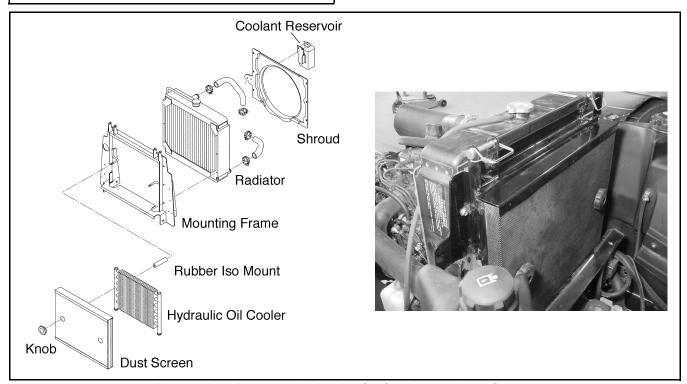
D-6. Radiator, Hydraulic Oil Cooler, and Dust Screen
